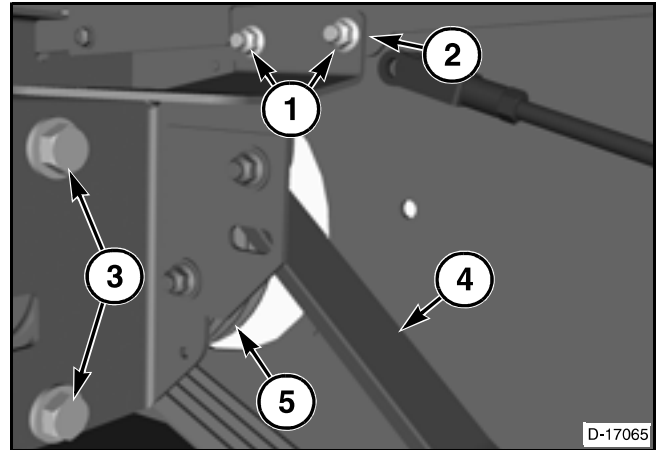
Remove the two flange screws, plain washers, and flange top lock nuts (1) securing the top of the pivot support (2) to the frame.
